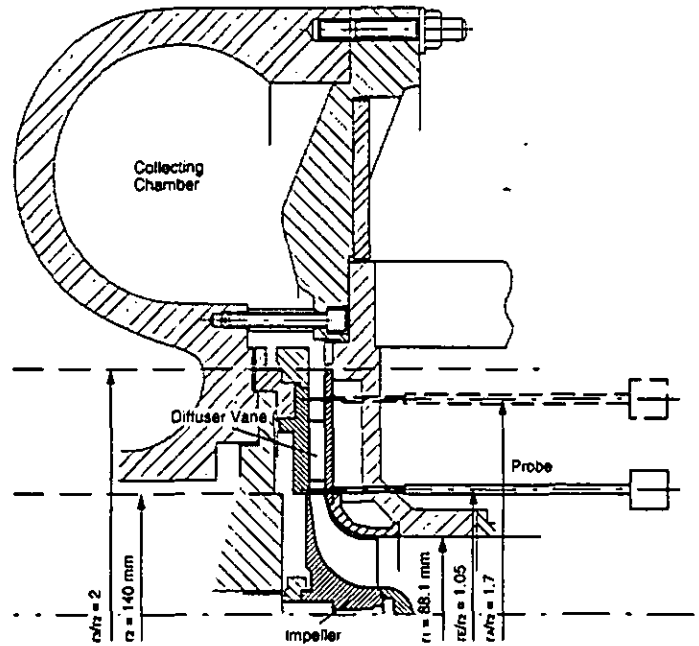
Cross-sectional view of the centrifugal compressor with probe locations
